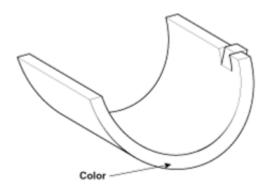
Identifying Exhaust Cam Shaft Bearing Identification Mark Courtesy of KIA MOTORS AMERICA, INC.
